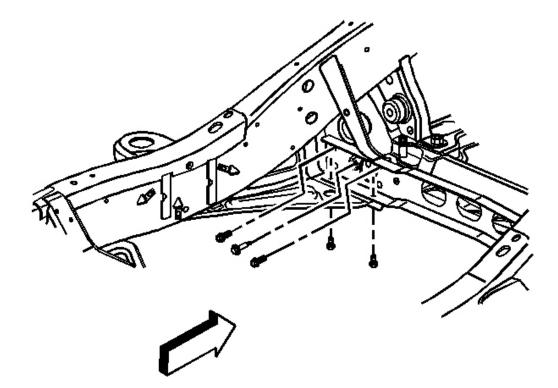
View Of Transmission Oil Cooler Line Retaining Bracket & Bolt Courtesy of GENERAL MOTORS CORP.
